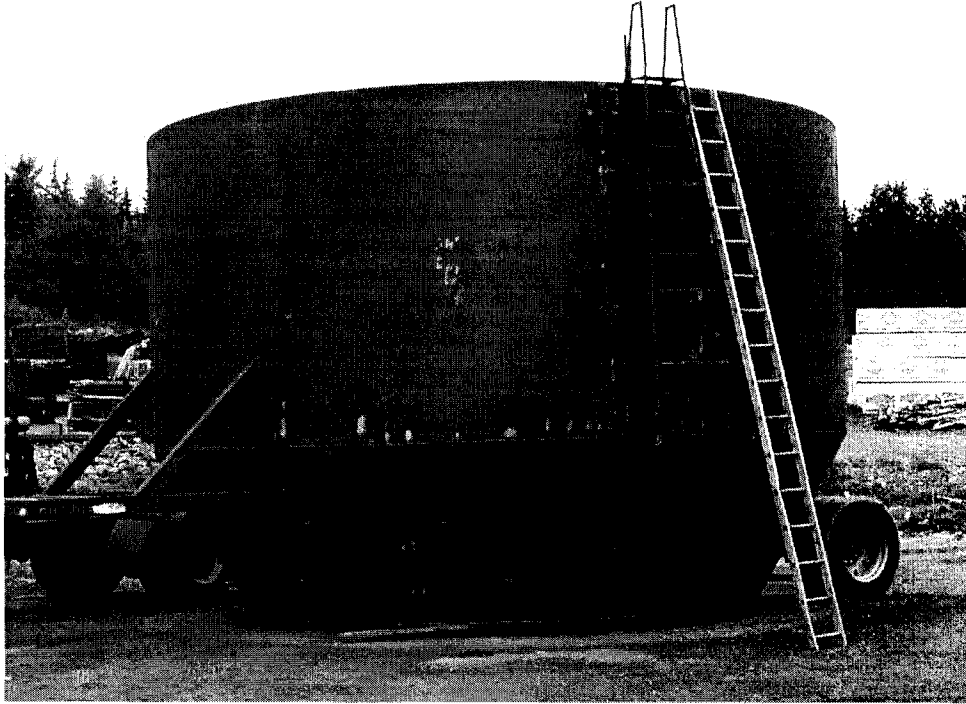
Main Hull and Chine Level assembled together. Wheels are welded to the Chine Level to facilitate transport during construction.
